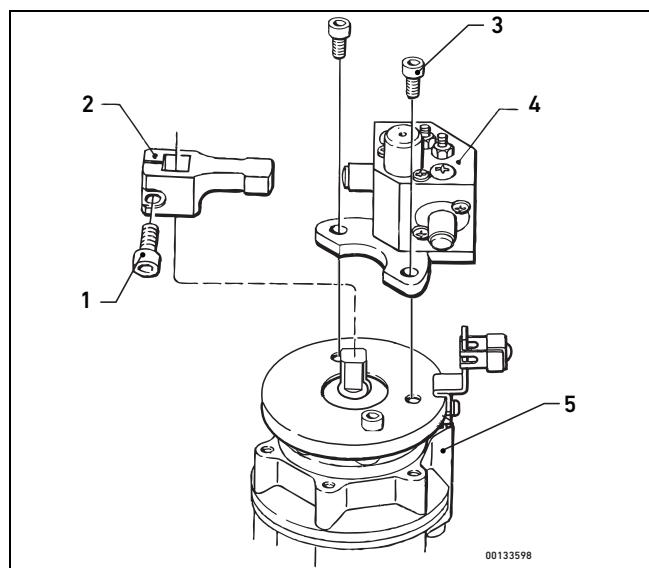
Fitting the hydraulic shock absorber, for size 6 to 8
